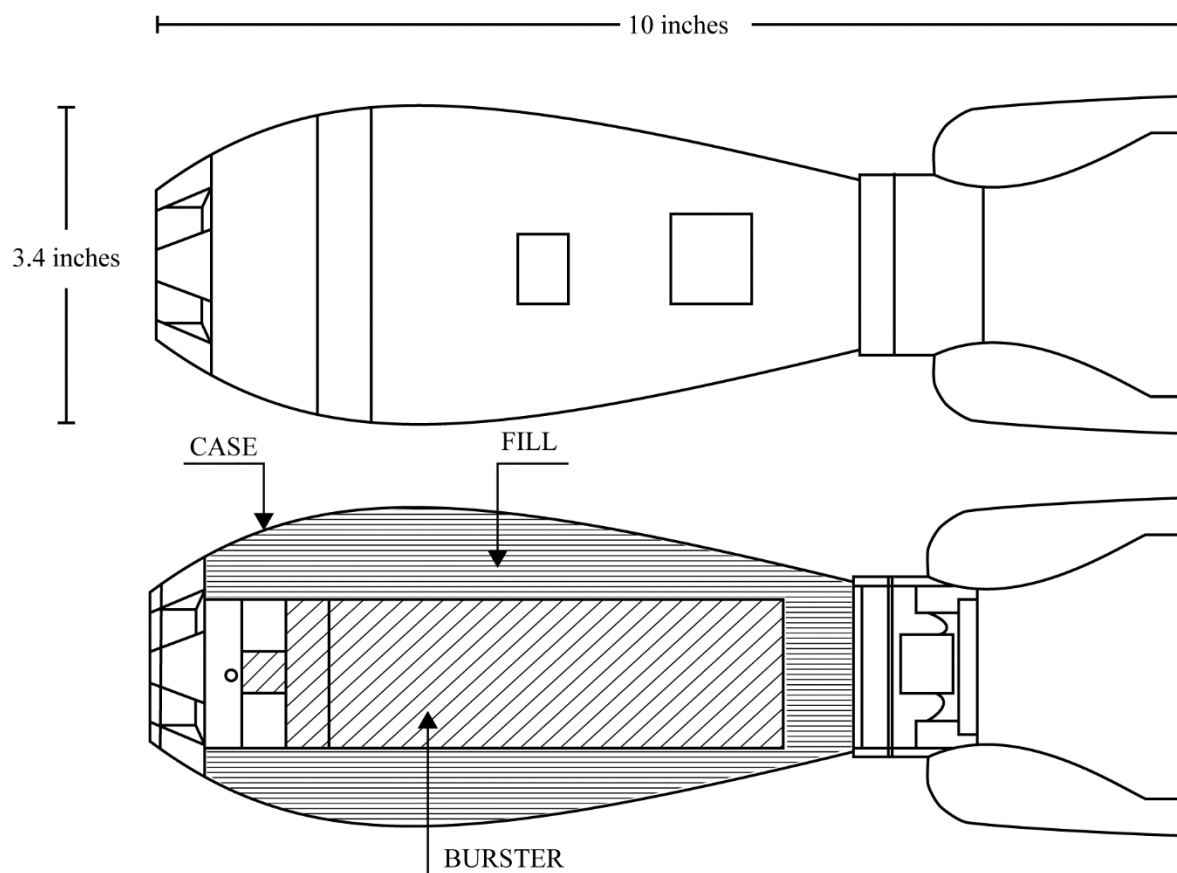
Bomblet, 3-pound, E91, E91R1 - Line Drawing
